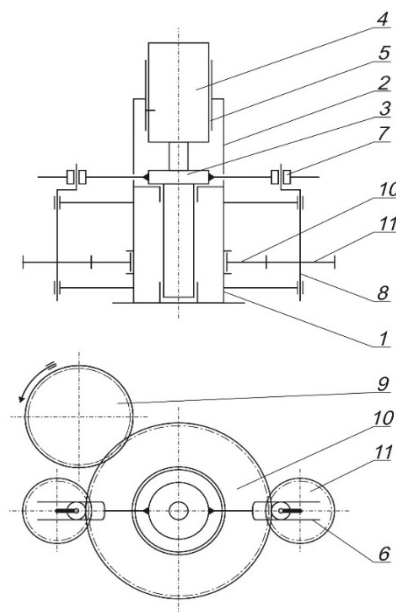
Kinematic diagram of a compression device with oscillating torsion. 1. Lower body, 2. Upper body, 3. Lower punch, 4. Upper punch, 5. Non-rotating slidable bearing, 6. Fork – lower punch arm, 7. Roller, 8. Crankshaft (eccentric), 9. Driving gear, 10. Ring gear, 11. Gear wheel
